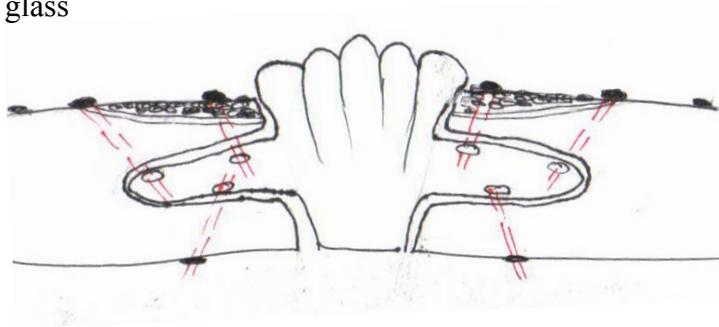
Mould casting in progress showing pouring sprue in centre
